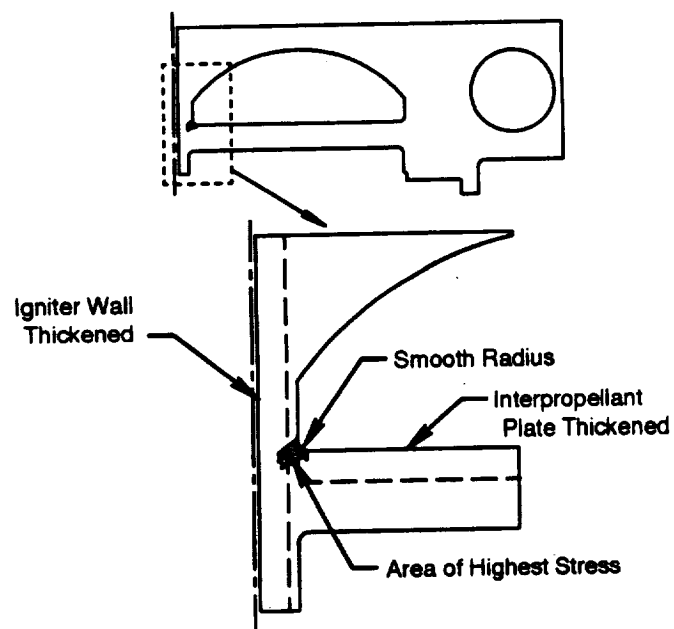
Redesign of Injector Housing and Interpropellant Plate
